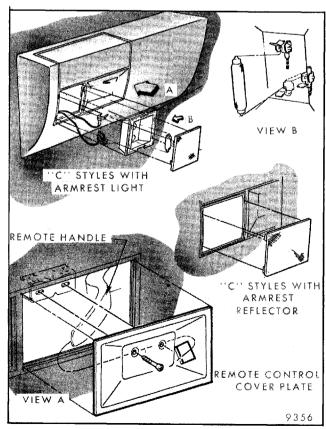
Typical Remote Control Handle Cover Plate and Courtesy Lamp - C Styles
